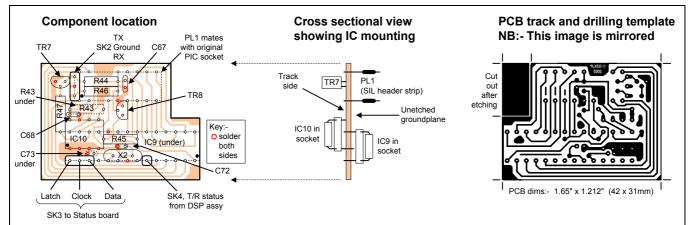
Double-sided PicAdapter board PCB. The cut-out is to give access to the existing programming socket. IC10 and IC9 should definitely be mounted in sockets. To achieve the clearance height required you may need to first fit an extra 18-pin socket into the existing Pic 'N' Mix socket - as a spacer. SIL plugs / sockets are used for the remaining leads - with the sockets soldered directly to the track.
